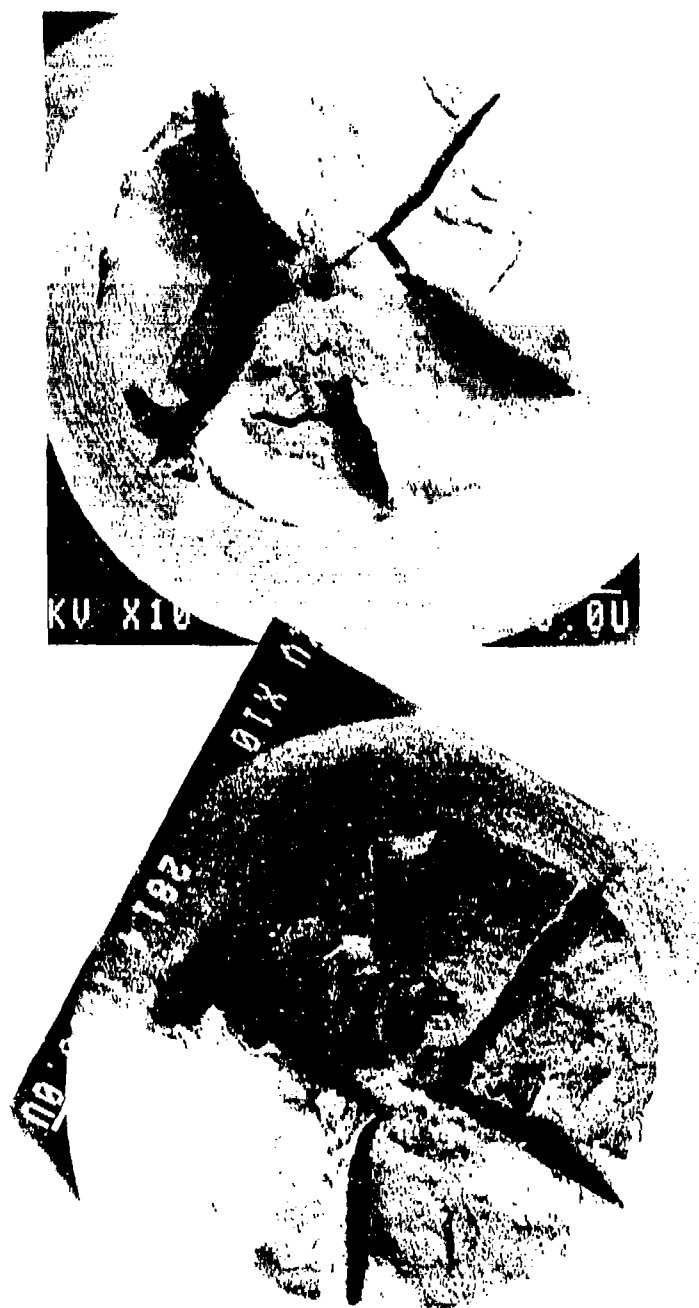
Scanning electron photomicrographs of the matching fracture surfaces of tensile specimen GFF-2 tested at  $-18^{\circ}\text{C}$  showing longitudinal cracks (10X).
